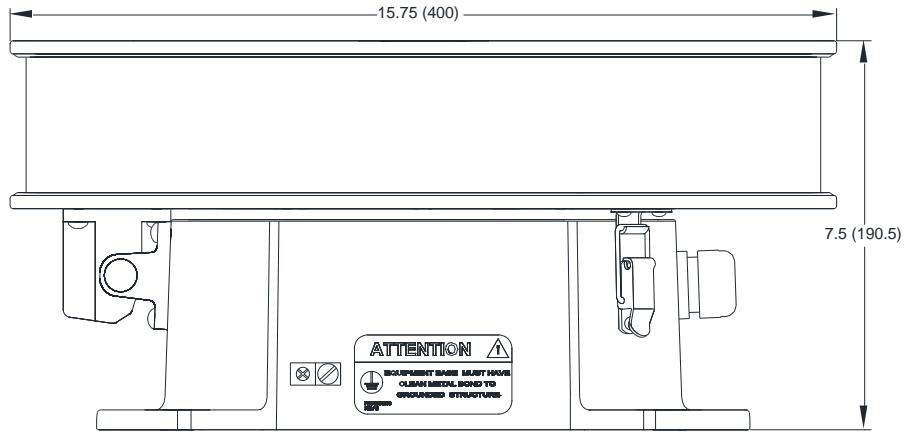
Flashhead/Beacon FTS 371 FH mounting and outline view
